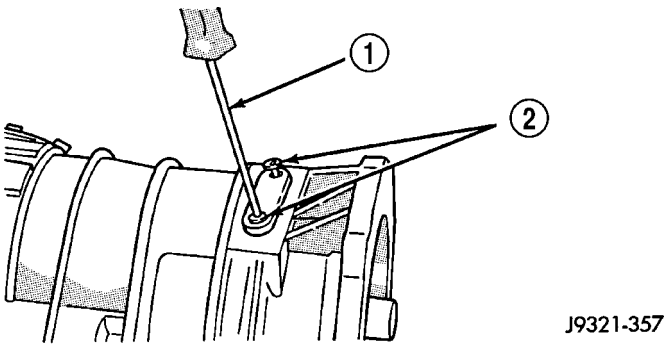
Overdrive Clutch Reaction Snap-Ring Removal
